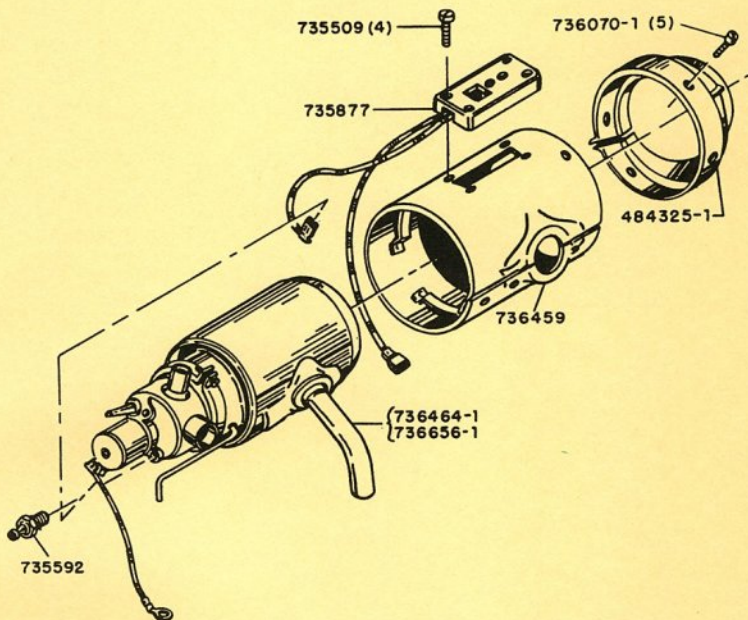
HEATER ASSEMBLY FOR KIT MODELS 8342-8343 (736478)
